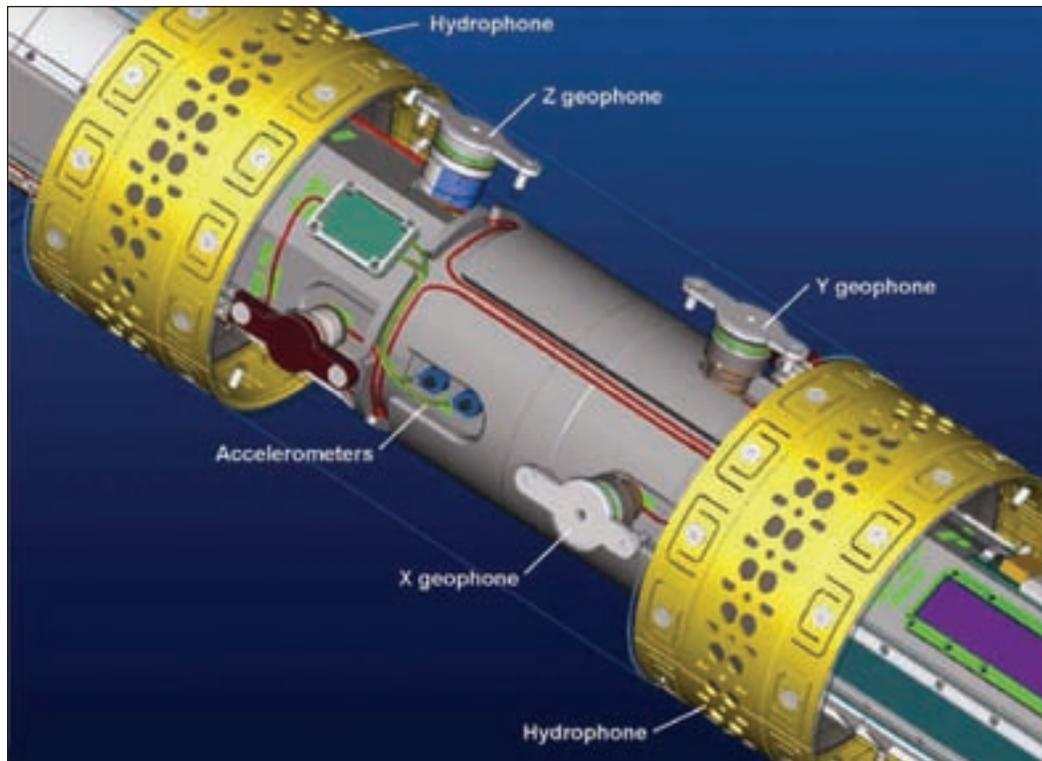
One drill-string seismic sensor package used to acquire seismic data while drilling. This module is positioned in the bottom-hole assembly near the drill bit.
